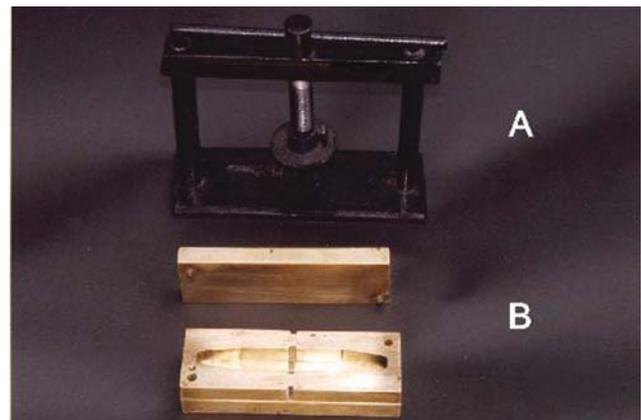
(A) Clamp, (B) special brass flask with removable 3 mm brass spacer in center
